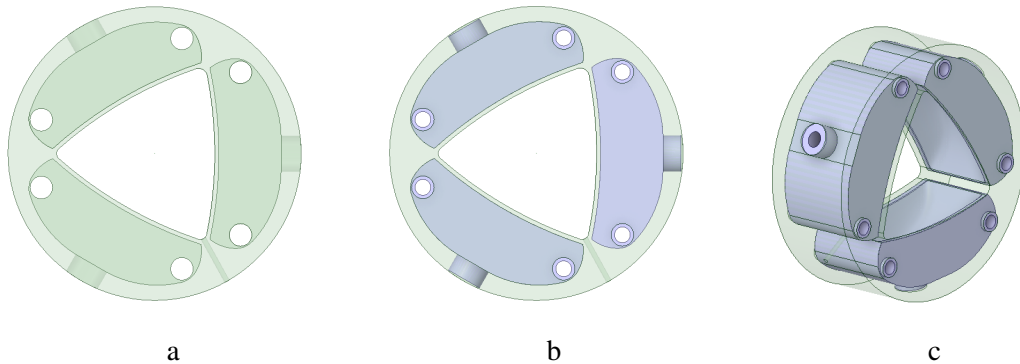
DCM v2 silicone mould without (a) and with (b) the acrylic haustra parts inserted
